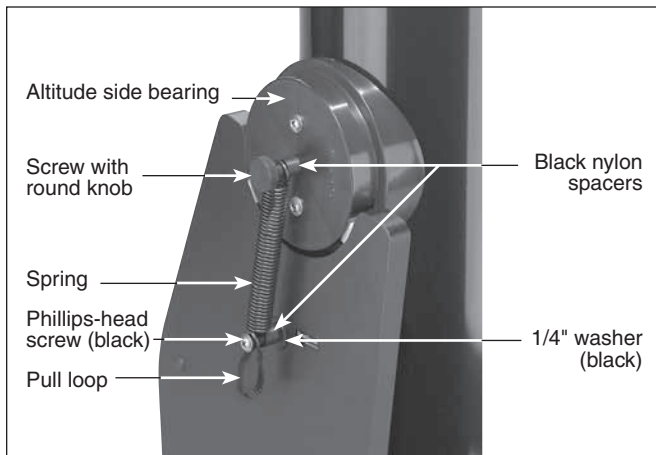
Close-up view of the CorrecTension system, which pulls the tube assembly down onto the altitude bearing pads.
